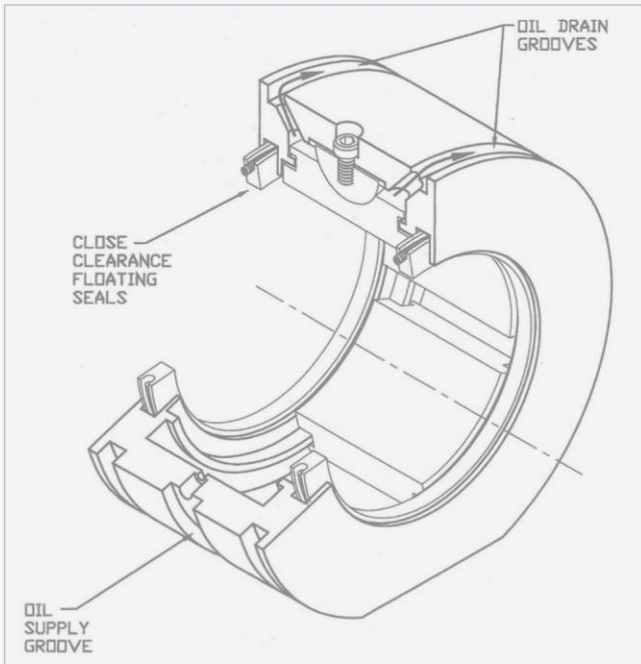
Drawing of a Tilting Pad Journal Bearing Utilizing the Floating Endseal Concept
